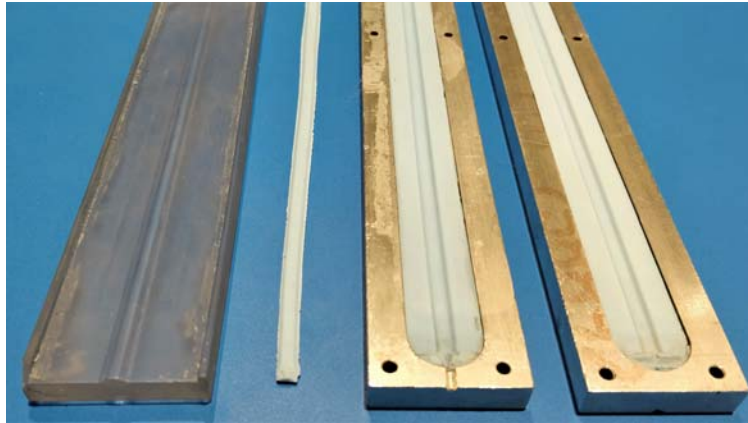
Silicone rubber molds used to manufacture the lenticular battens. The 3D printed part shown on the left is used to mold the blue female silicone plugs enclosed in their aluminum cages. The male silicone plug is directly molded from the female silicone plugs.
